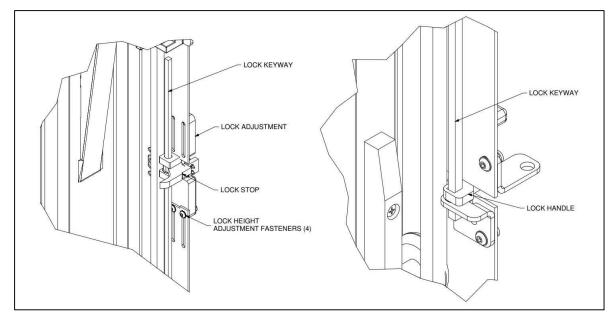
LOCKING SETUP (Right Hand Guide – Unlocked State)
